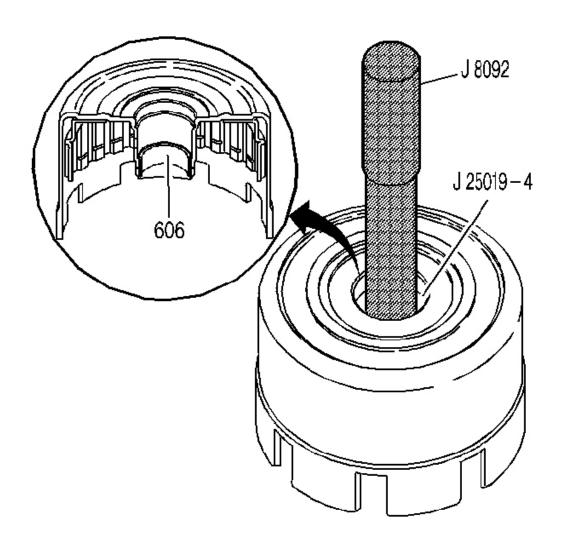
Locating Reverse Input Clutch Rear Bushing Courtesy of GENERAL MOTORS CORP.
